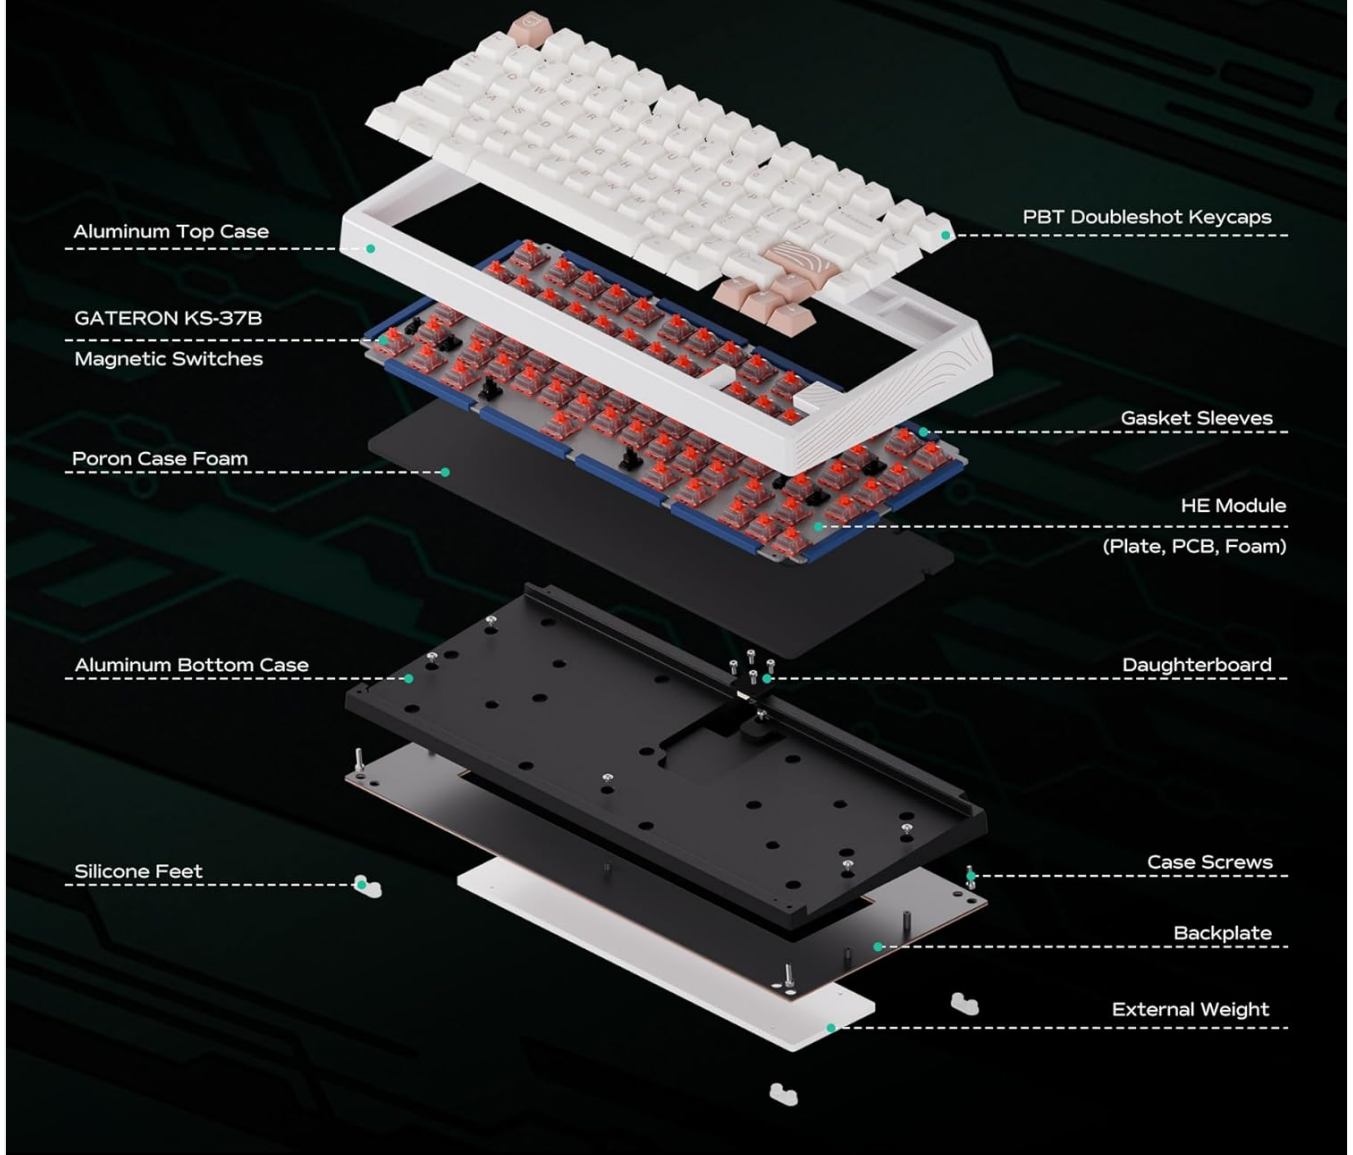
Exploded diagram showing the components of the BOOG75's gasket mount structure, including the aluminum top and bottom cases, switches, and gasket sleeves.
